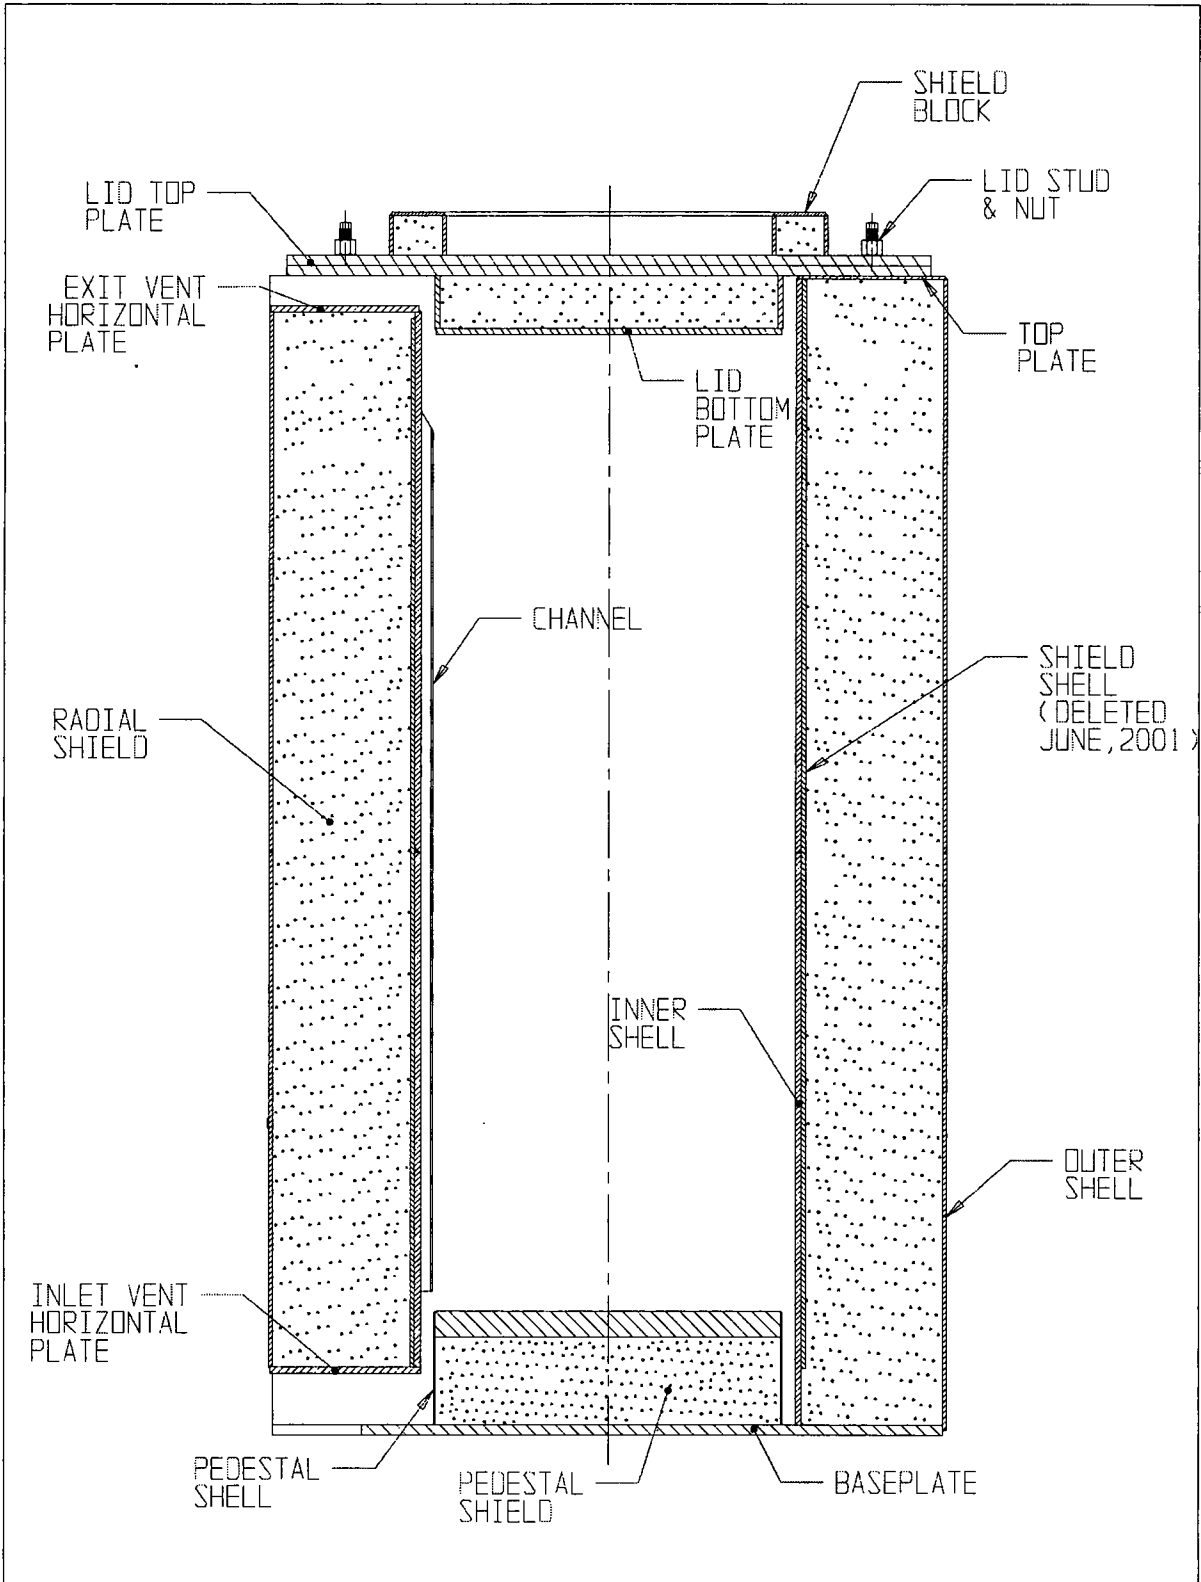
; HI-STORM 100 OVERPACK CROSS SECTIONAL ELEVATION VIEW
